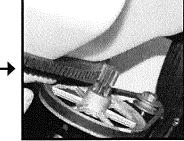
Turn mixing drum to check for smooth operation of mixer. Make sure drive gear and mixing gear are centered and flush to each other.
